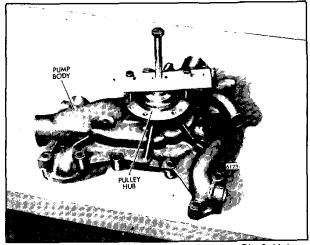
Removing Pulley Hub From Bearing Shaft Using Tool J 29190-A
